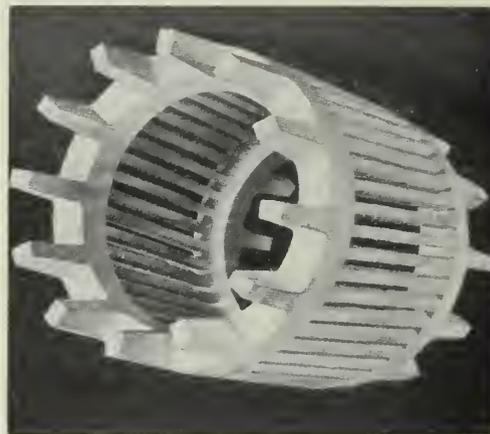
Cast Rotor for Squirrel Cage Type Induction Motor showing Rotor Bars and End Rings.
